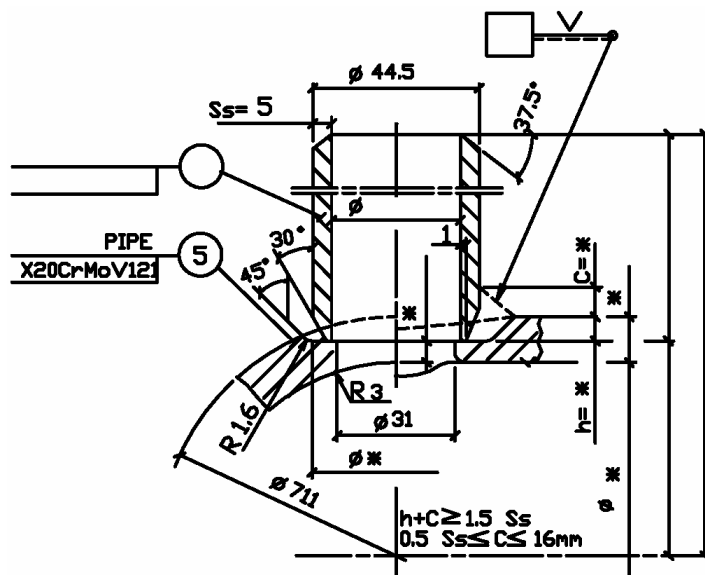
The detail of the joint between the outlet header and the tubes connecting to it [4].
